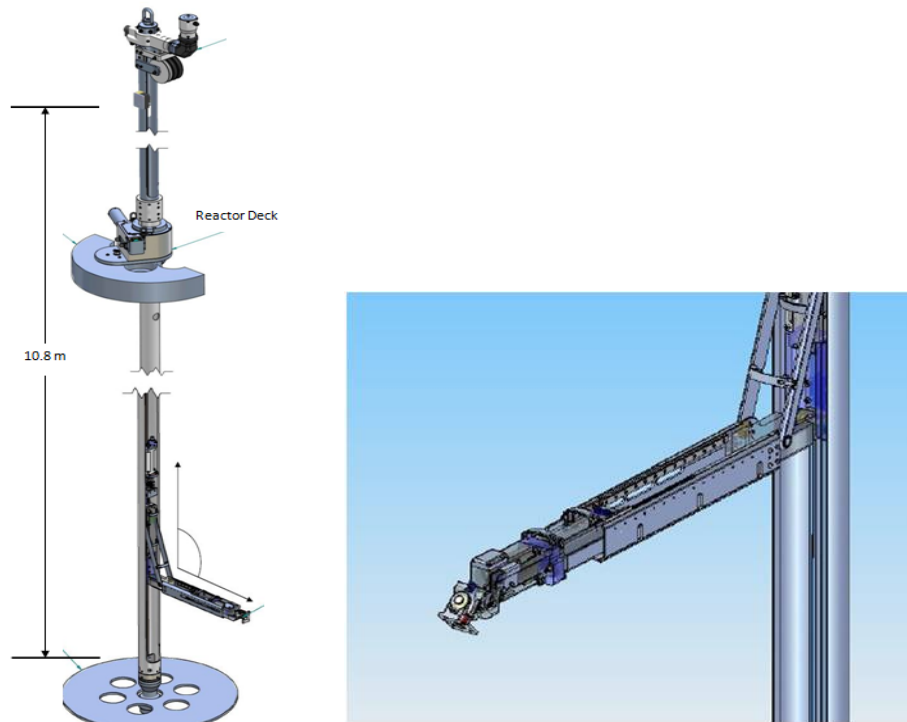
View of Delivery Tool and of Robotic Arm Extended
